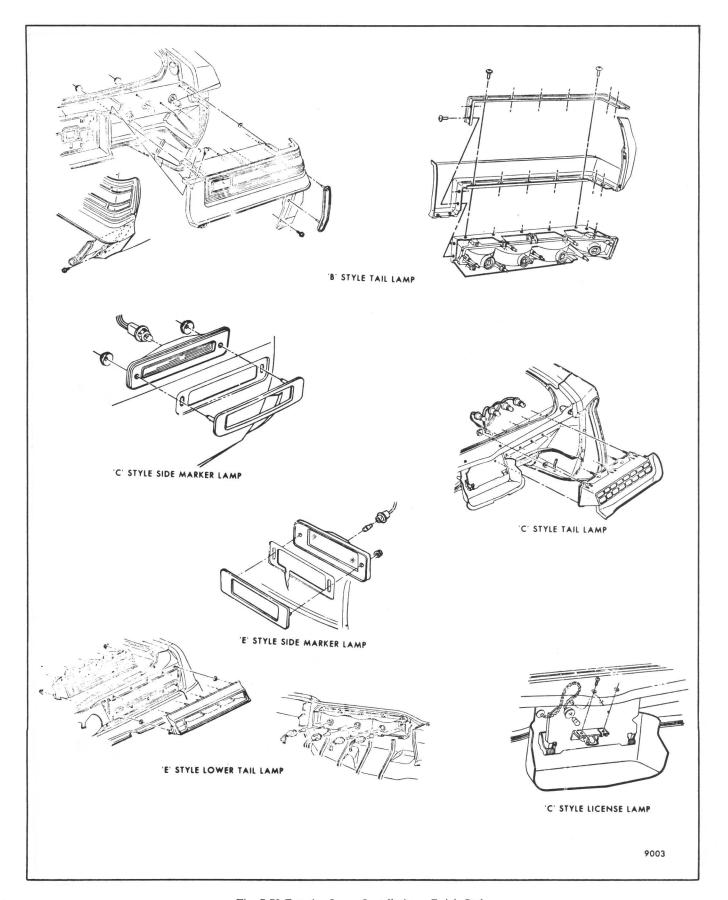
Exterior Lamp Installation - Buick Styles
